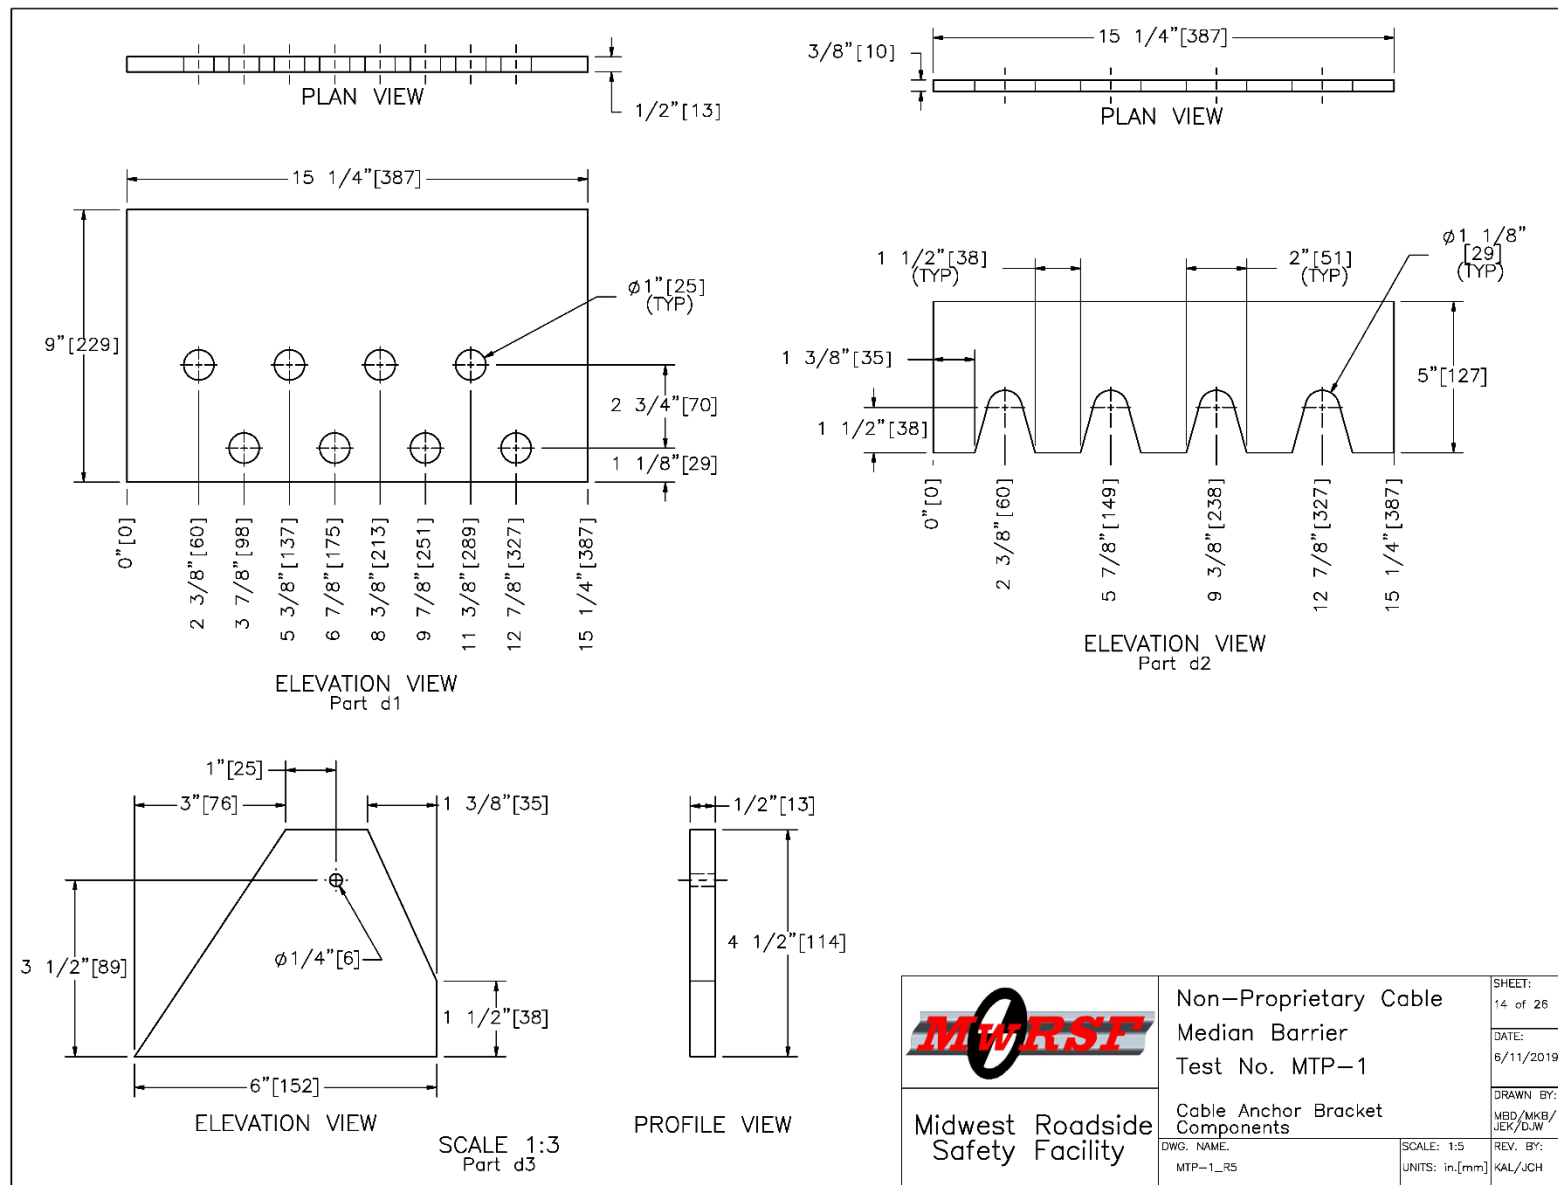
Cable Anchor Bracket Components, Test No. MTP-1
